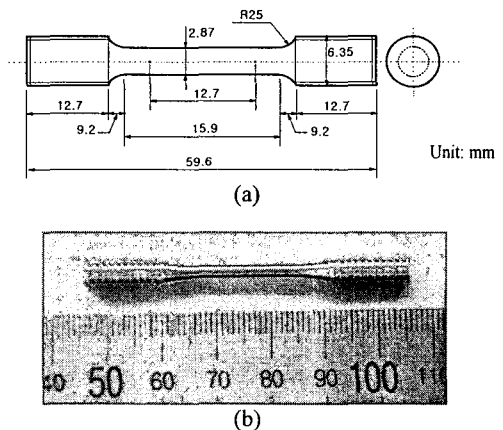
Subsize uniaxial tensile specimen of longitudinal direction, (a) geometry of uniaxial tensile specimen; (b) uniaxial tensile specimen
